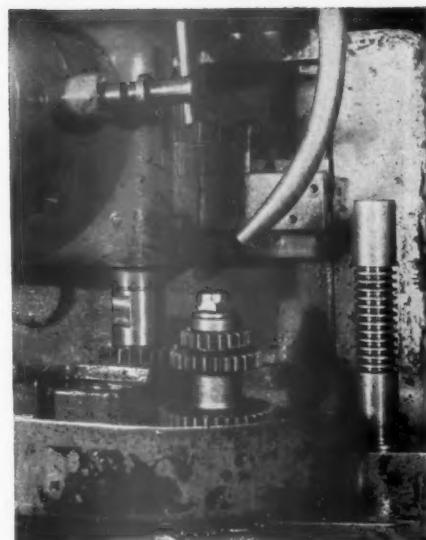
Cutting spur cluster gear by the Fellows gear shaping process.
